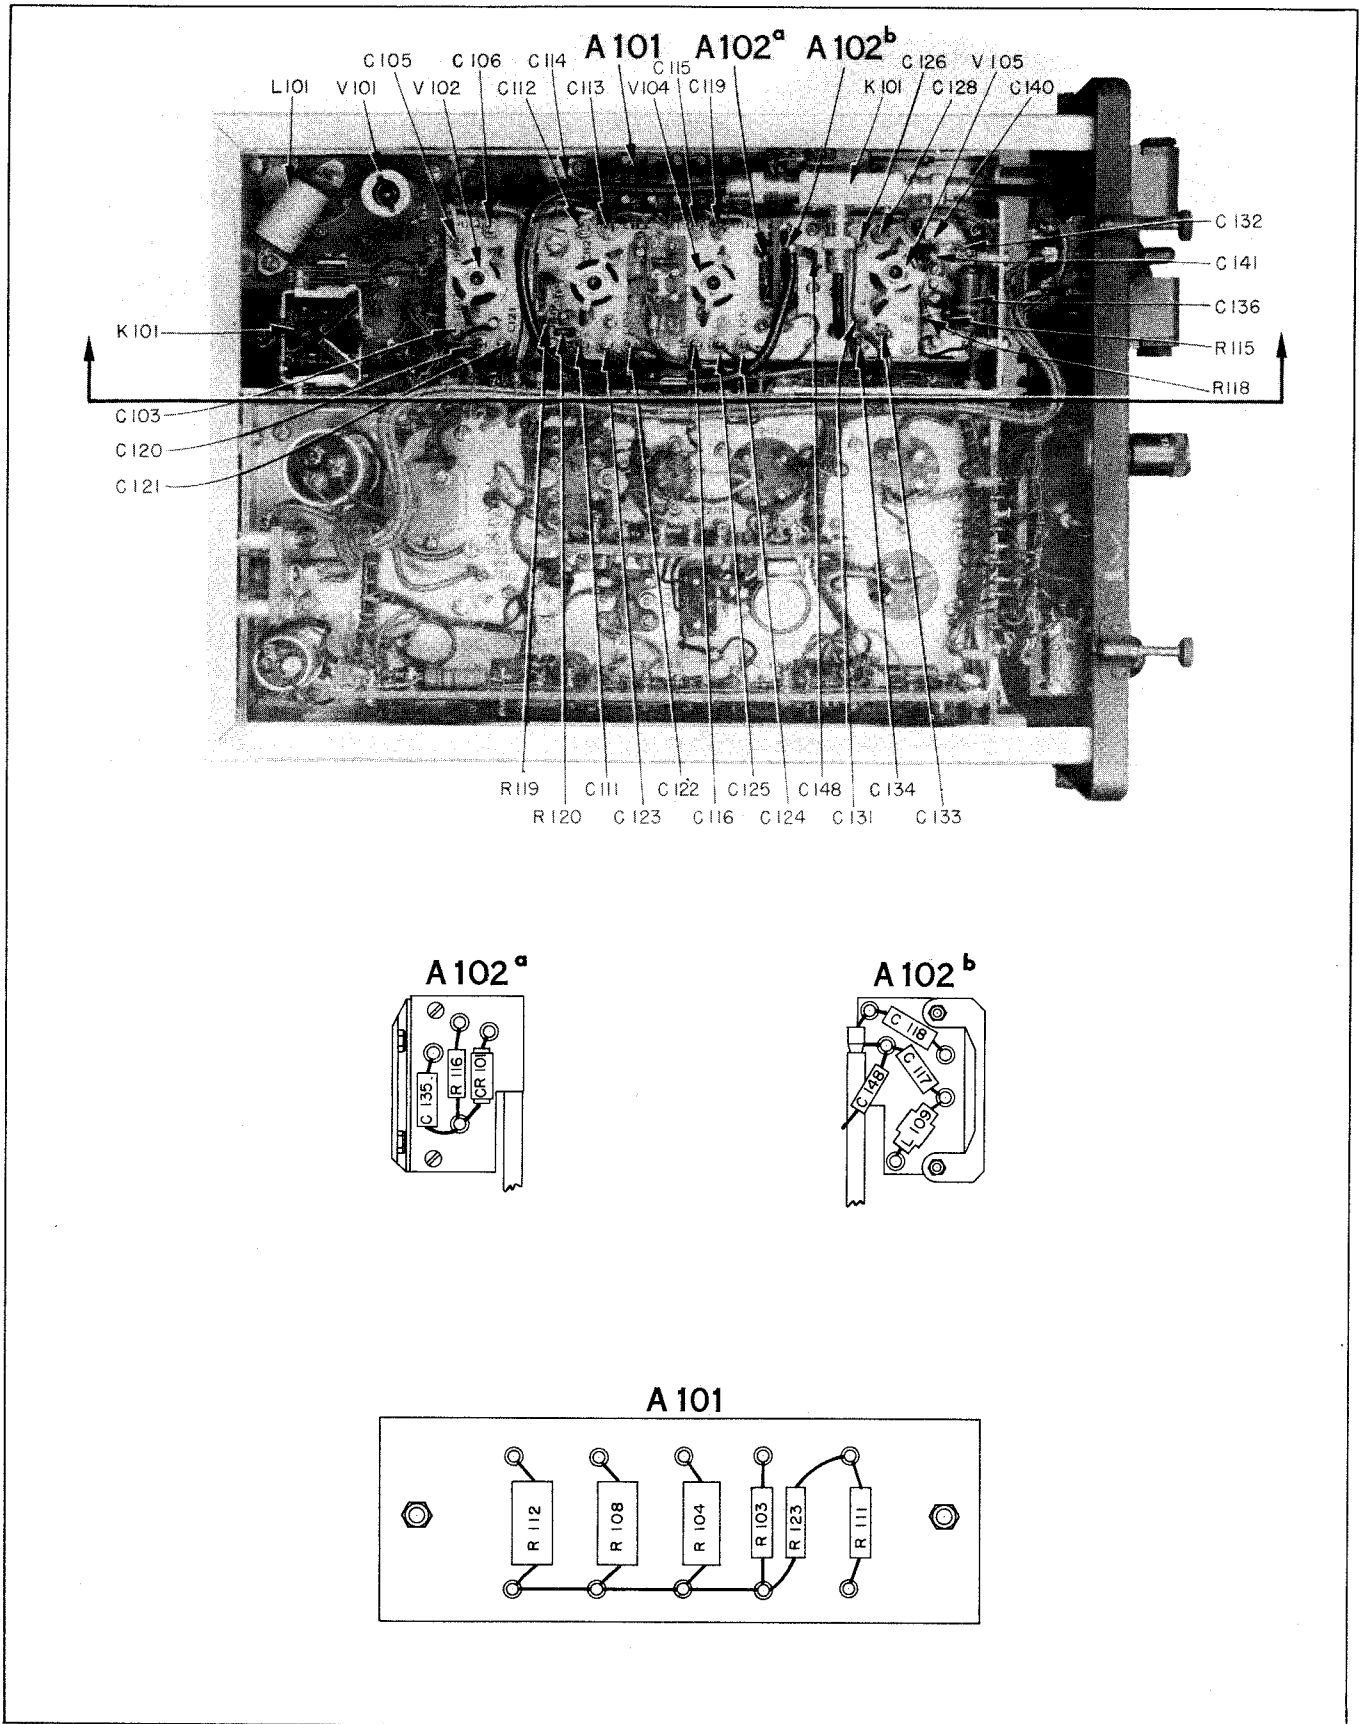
Top View of RF Chassis, Showing Component Locations.
